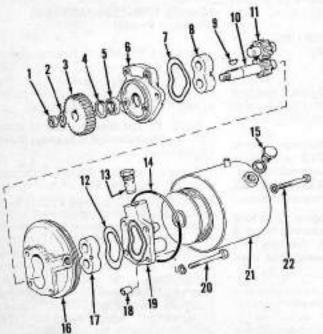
Exploded view of Plessey power steering pump showing component parts and their relative positions. Note in some applications, litter is relocated to a remote reservoir.
